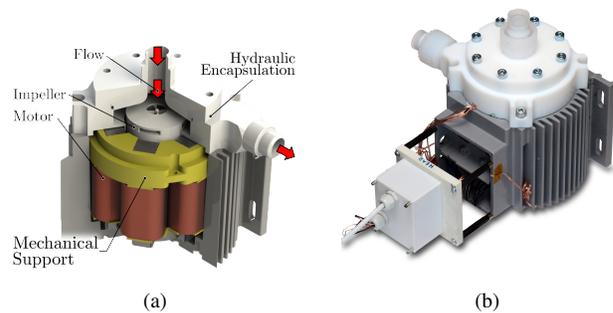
Schematic view (a) and photograph (b) of the bearingless ultra-high temperature pump.
